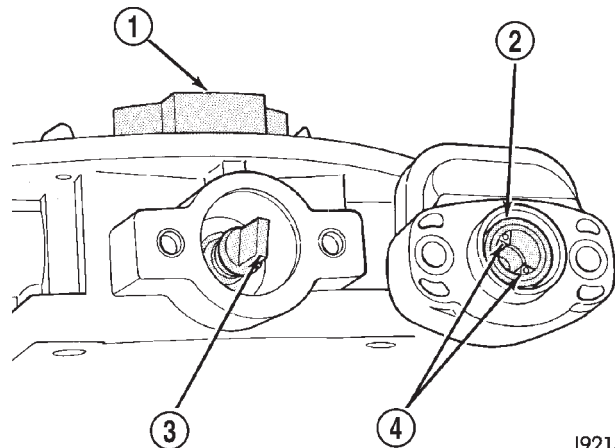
TPS Mounting Screws—2.5L Engine
